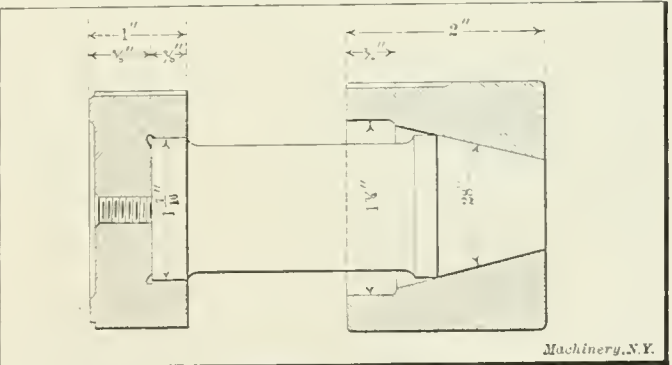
Adapter Bushings used in Holder shown in Fig. 2
